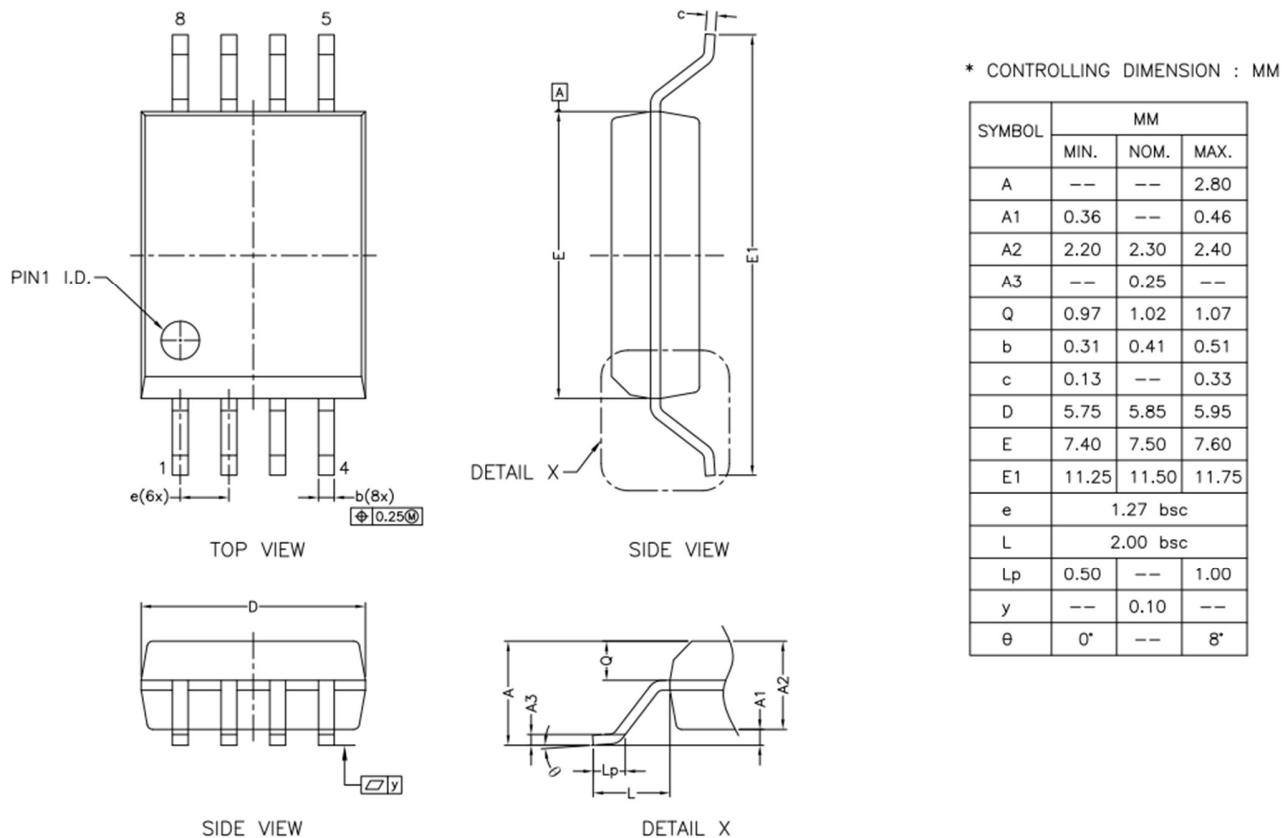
SOW8 Package Shape and Dimension in millimeters
